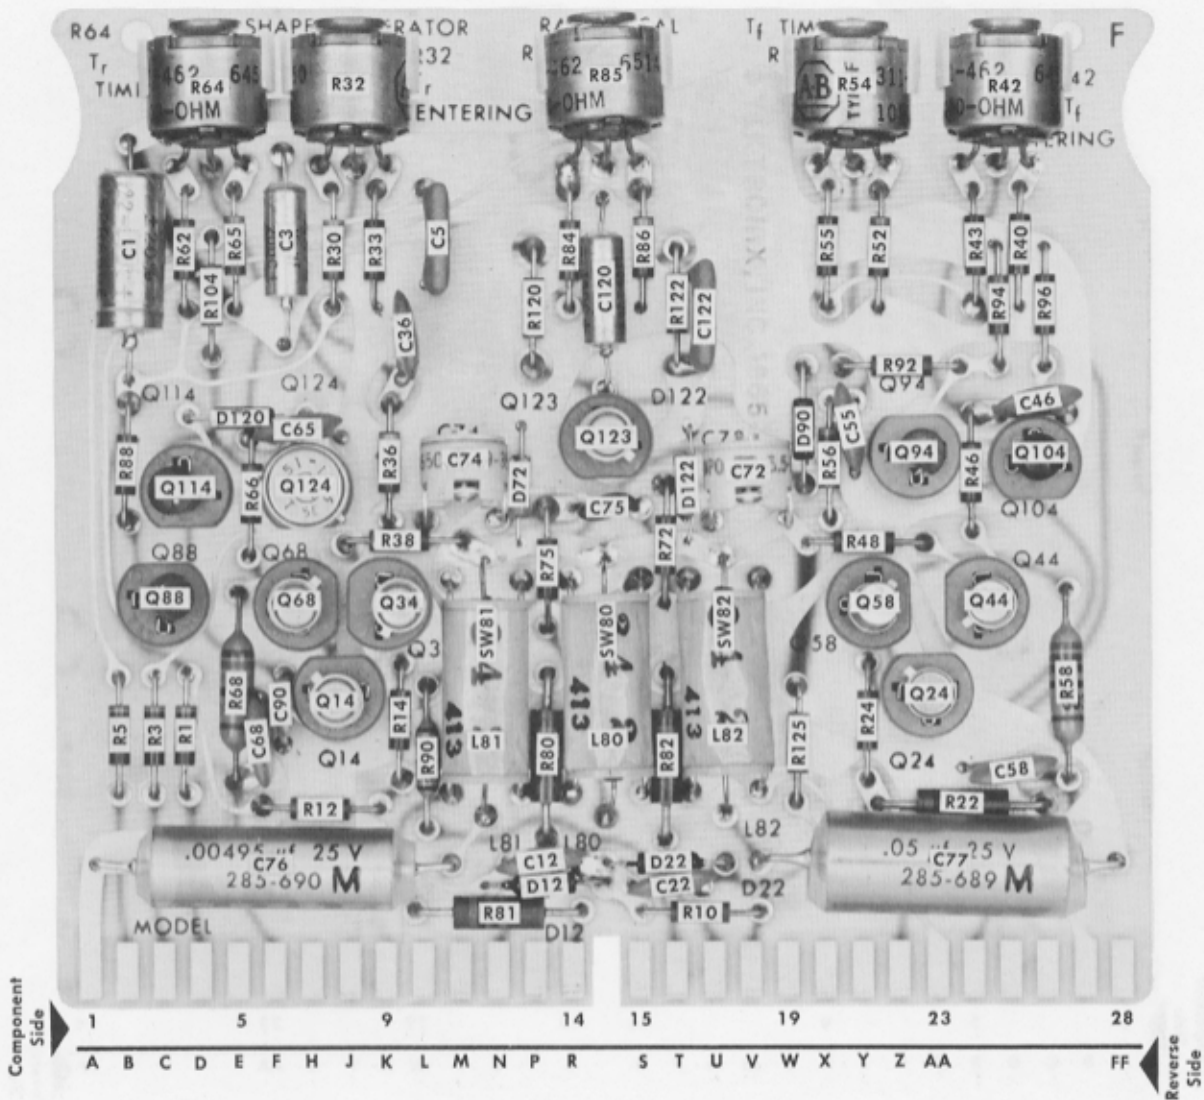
Location of circuit components on Pulse Shape Generator card.
